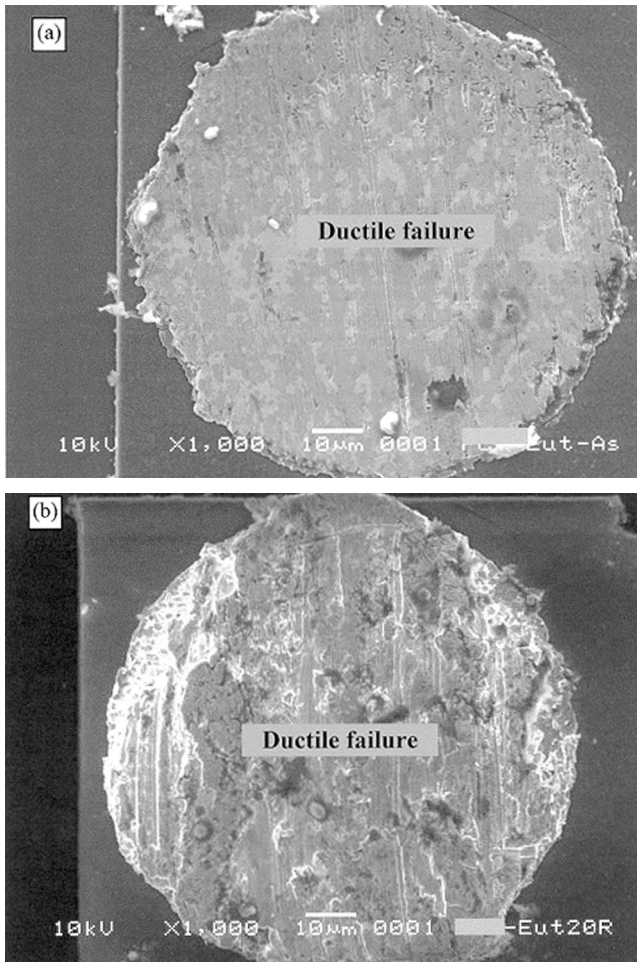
The fracture surfaces of eutectic SnPb solder joints after (a) 1 reflow and (b) 20 reflows at 220°C.
